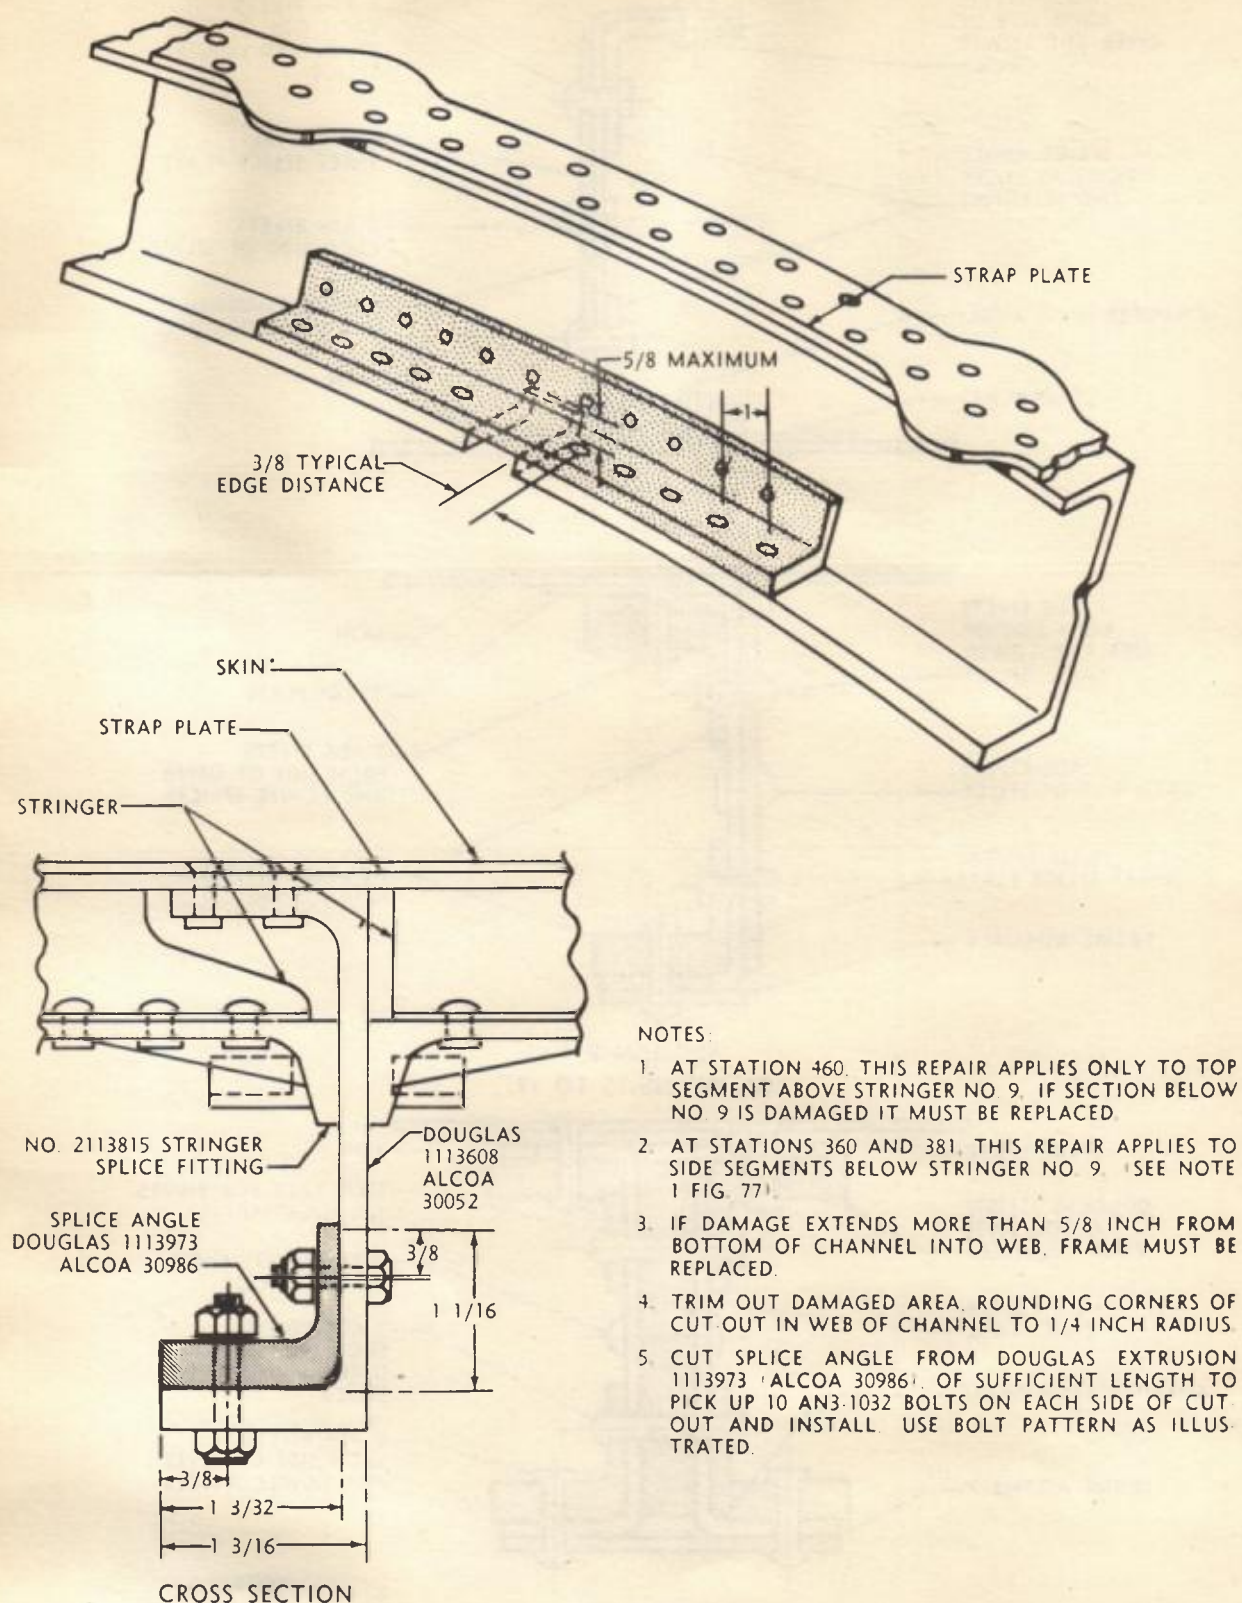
Fuselage Frame Repair — Extruded Channel — Stations 360, 381 and 460
